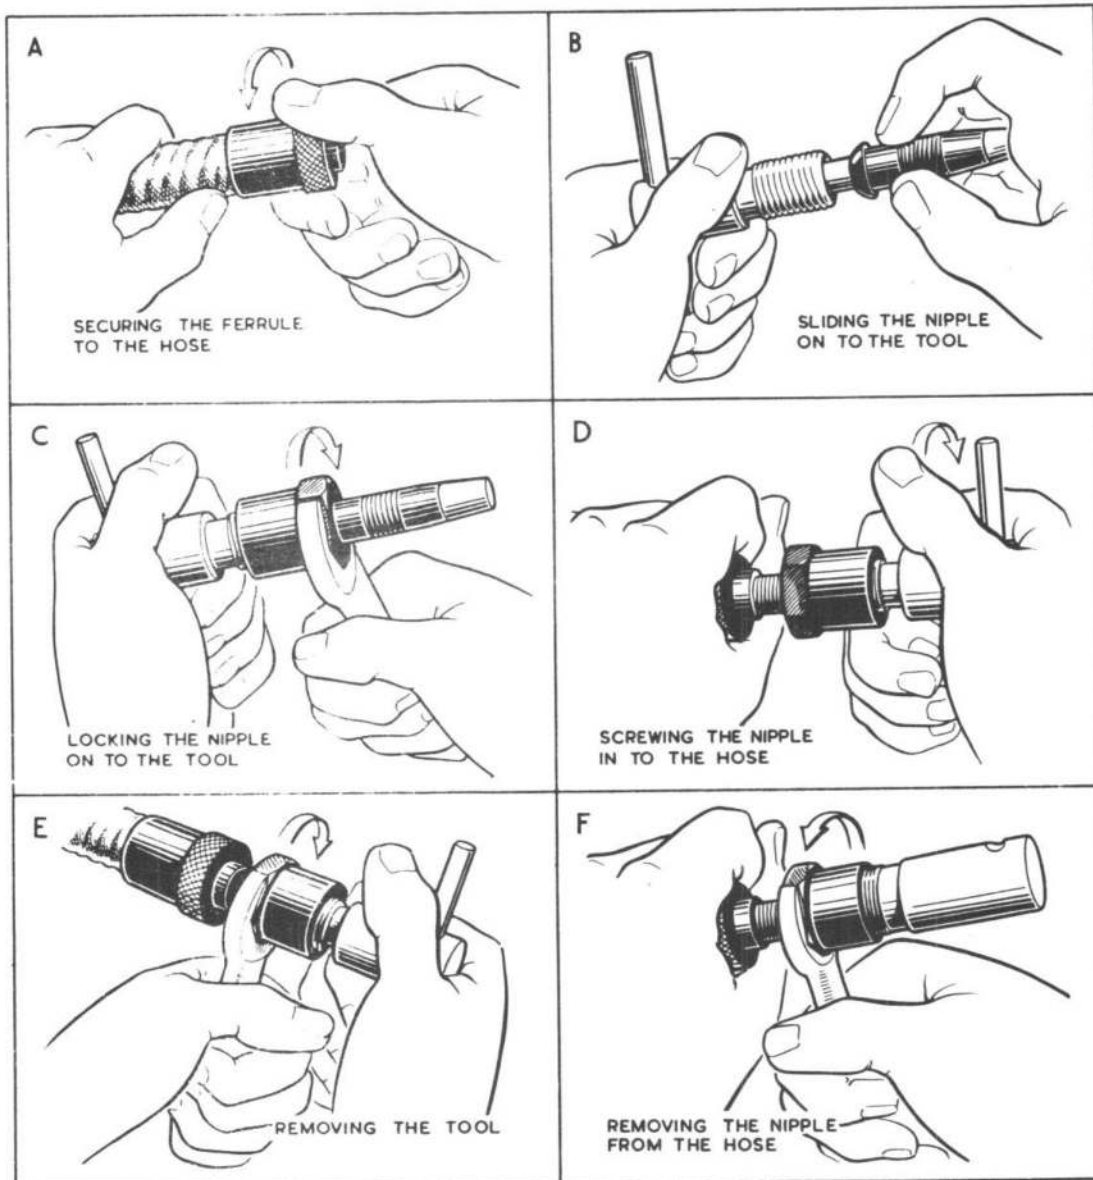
Attachment and removal of A.G.S. (Flylink) end fitting
